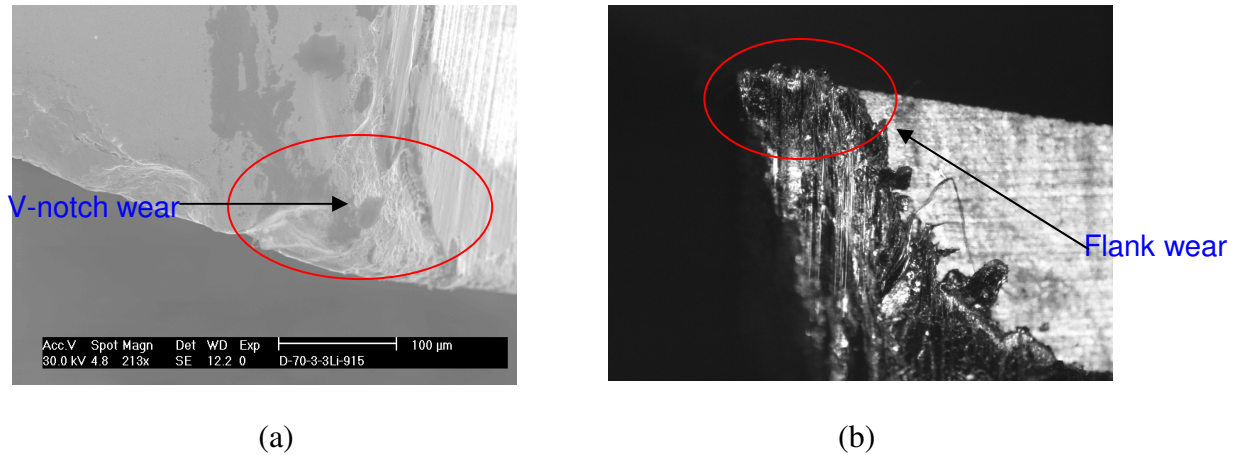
(a) V-notch wear and (b) Abrasive flank wear
